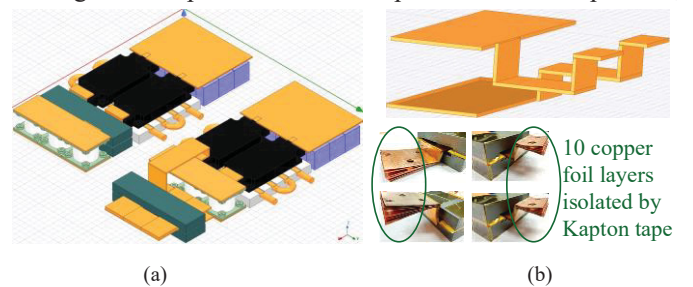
(a) One-turn and multiple-turn winding design layouts. (b) above: AC busbar 3D model; below: AC busbar assembly
